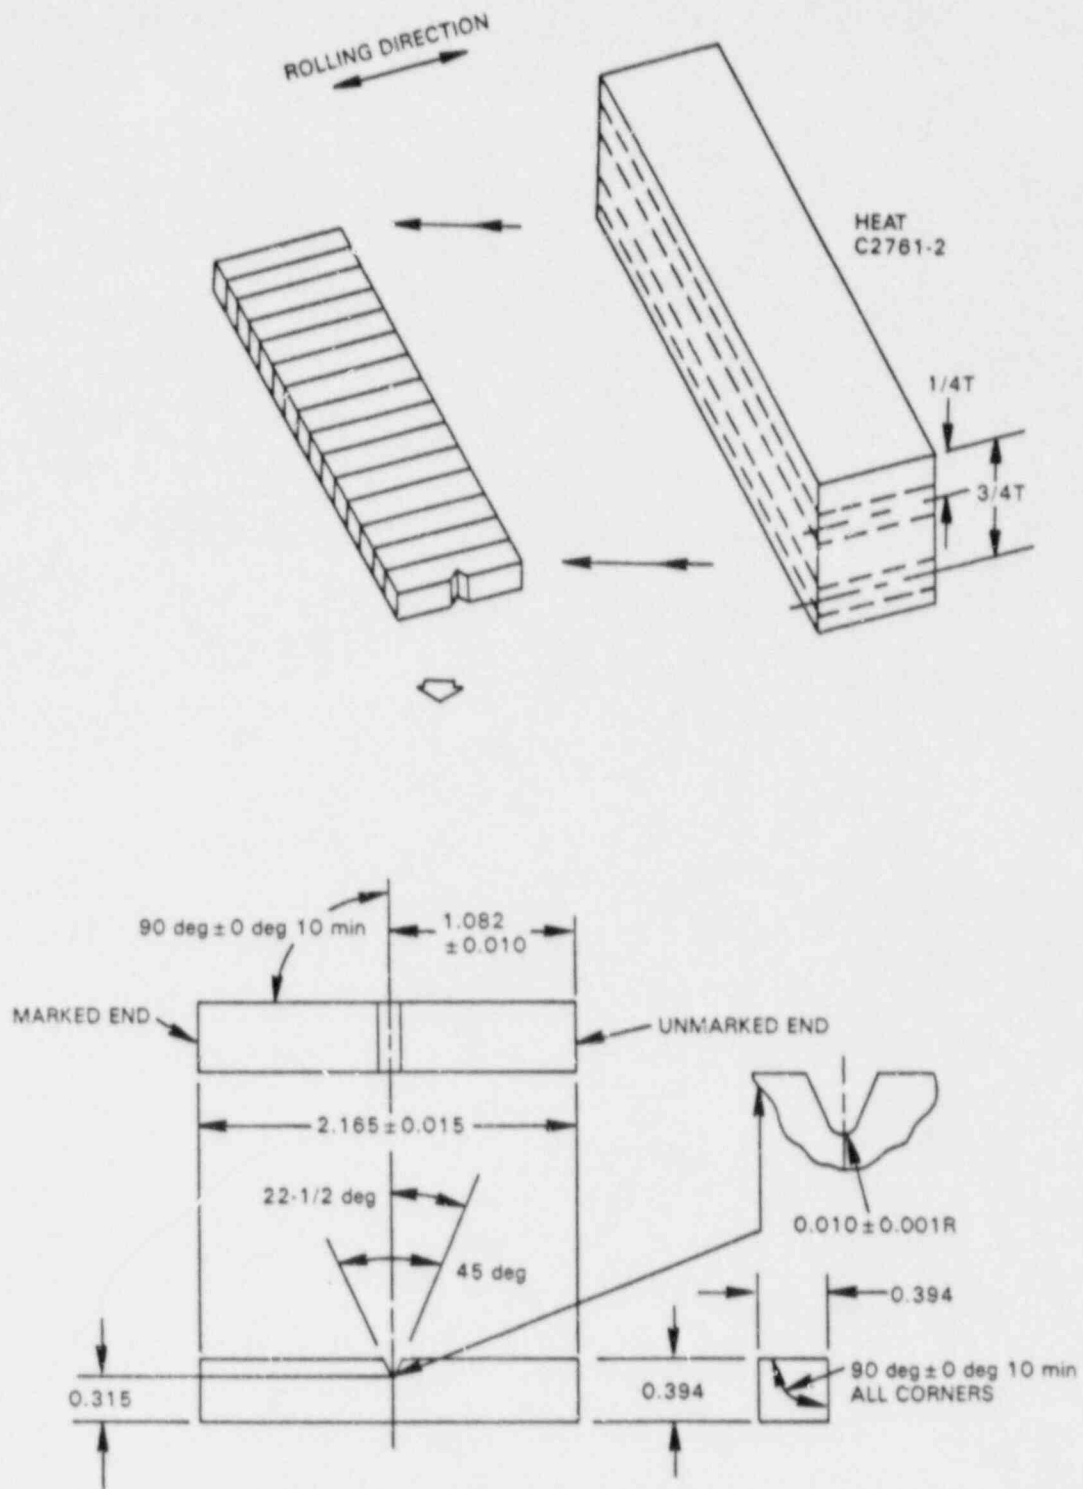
Fabrication Method for Base Metal Charpy Specimens
